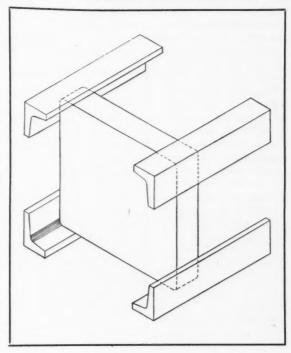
Drawing showing application of small angle iron sections which provide double end support.
